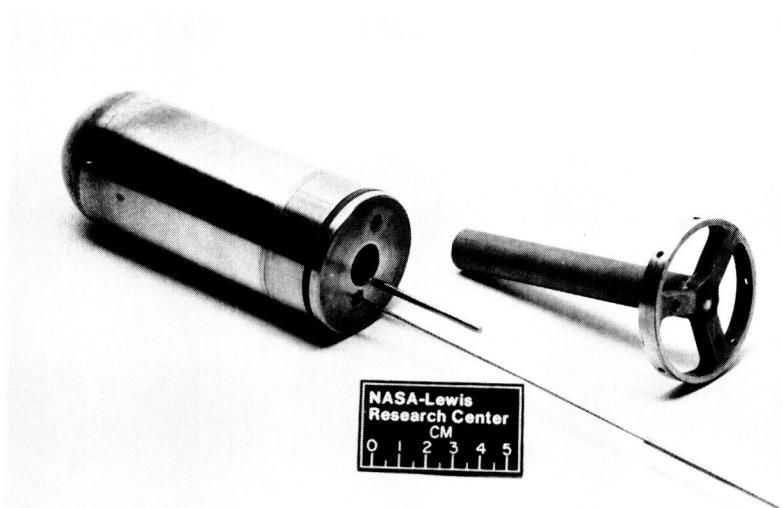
RE-1000 COOLER AND HOUSING.
